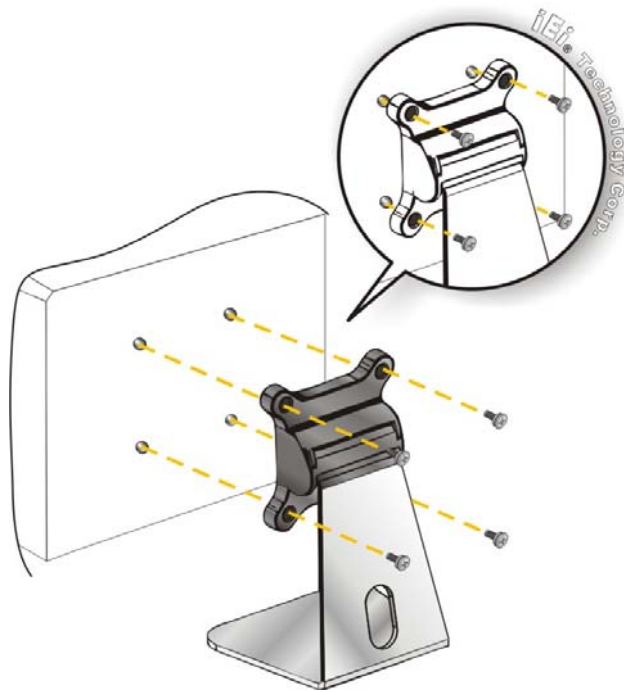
Stand Mounting (Stand-A/Bxx)
